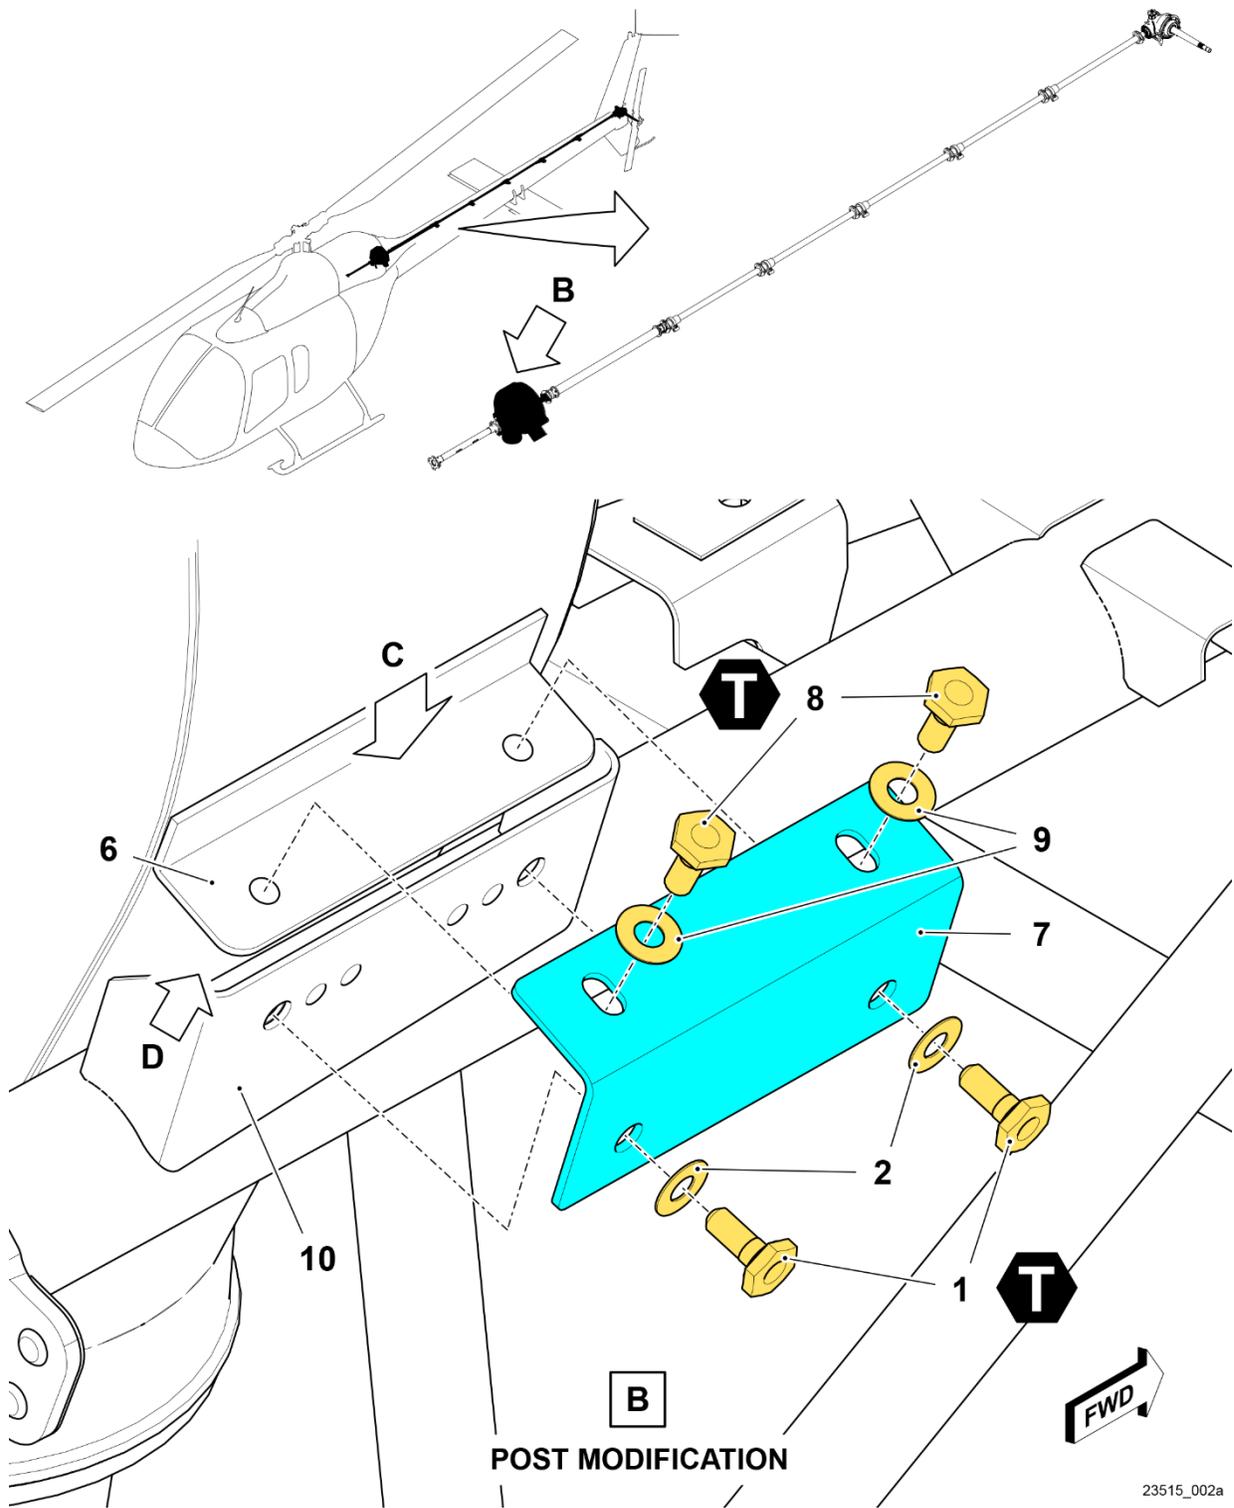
Oil Cooler Blower Housing Installation (sheet 1 of 4)
